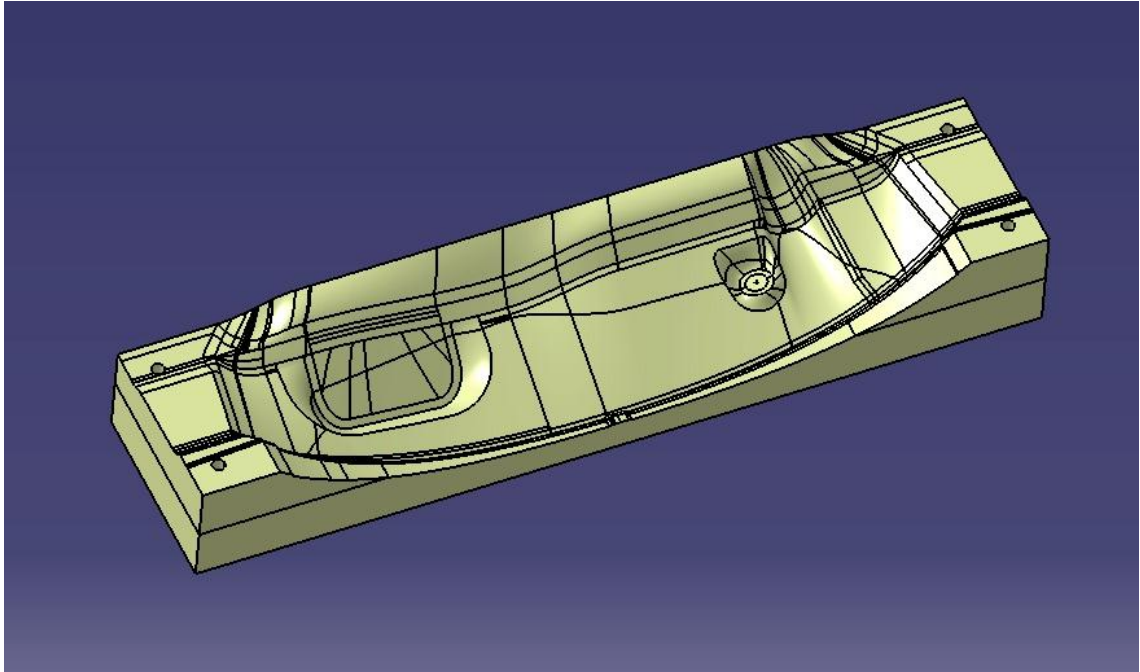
An example of a two piece mould (the holes, to set the mould halves firmly together, can be seen in each corner)
